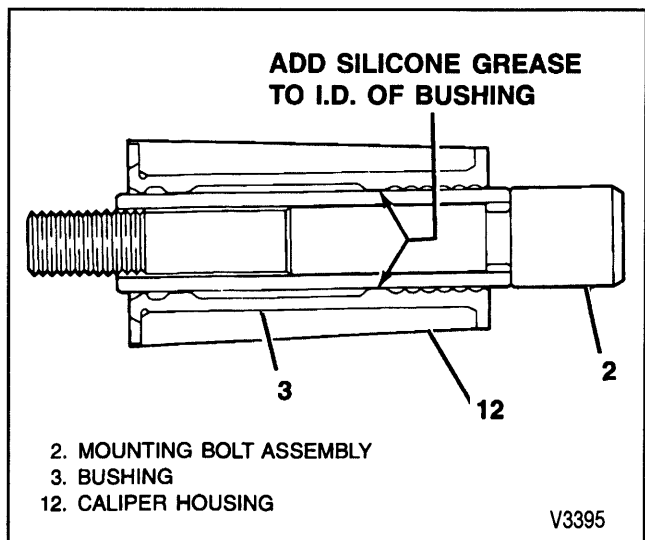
Mounting Bolt Lubrication (Delco 3486)
